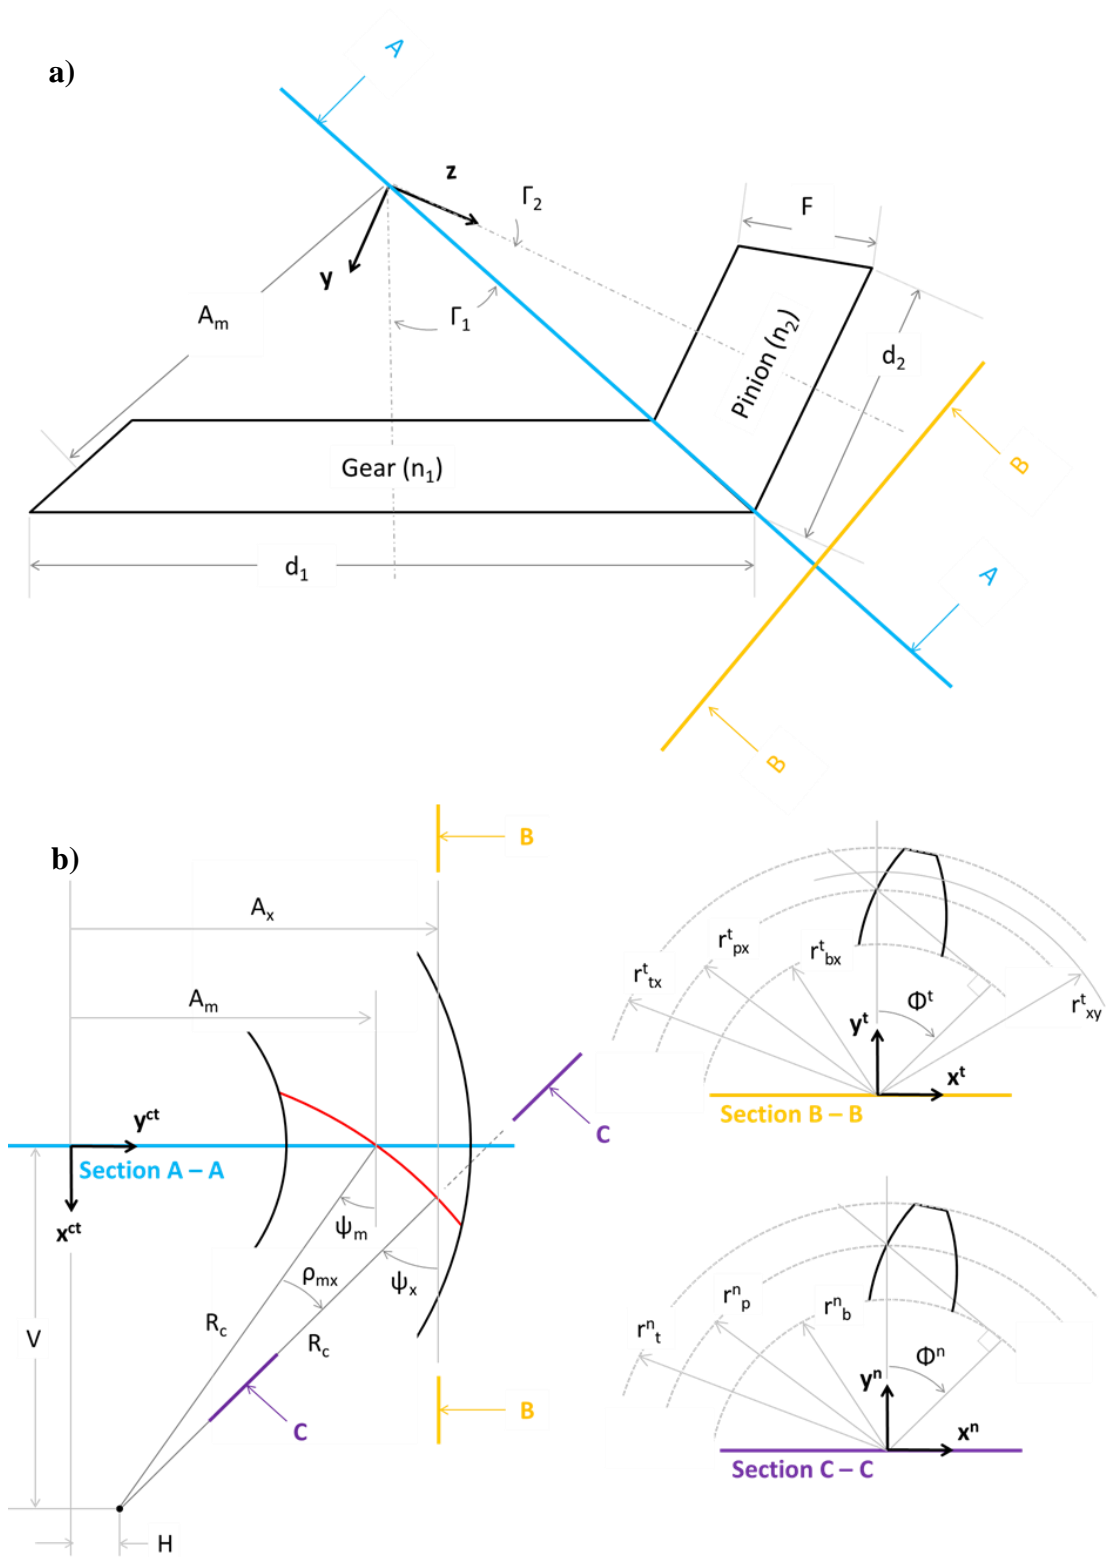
Bevel gear geometry a) Side view b) Sectional views
